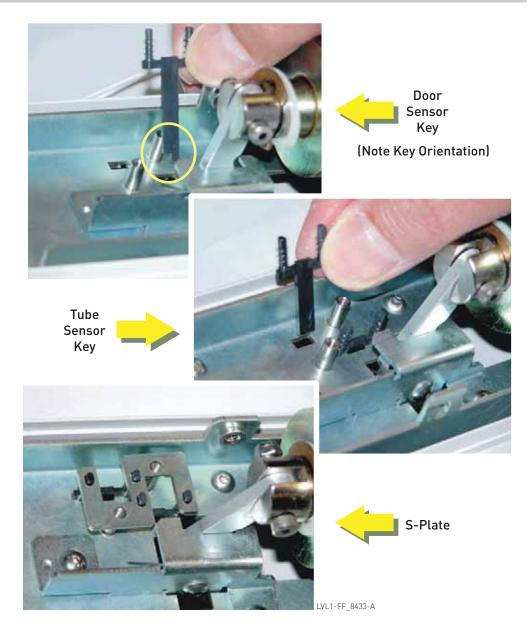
40: Reassembling the Optosensors and their actuating keys
